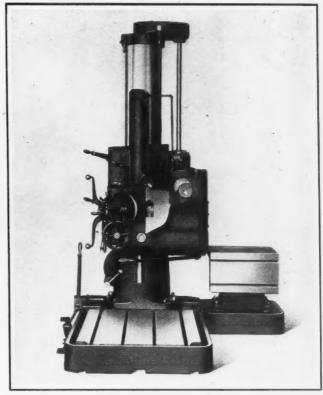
Carlton 4-foot Radial Drilling Machine, showing Plain Box Table, and Table Wing on Base
